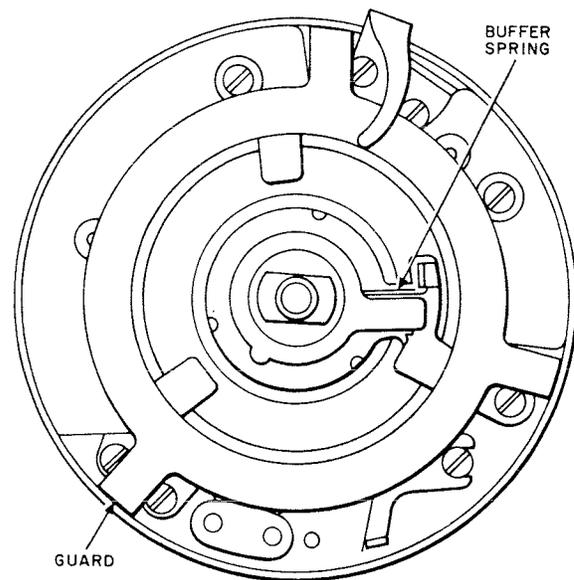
5-Type Dial Showing Buffer Spring and Metal Guard
